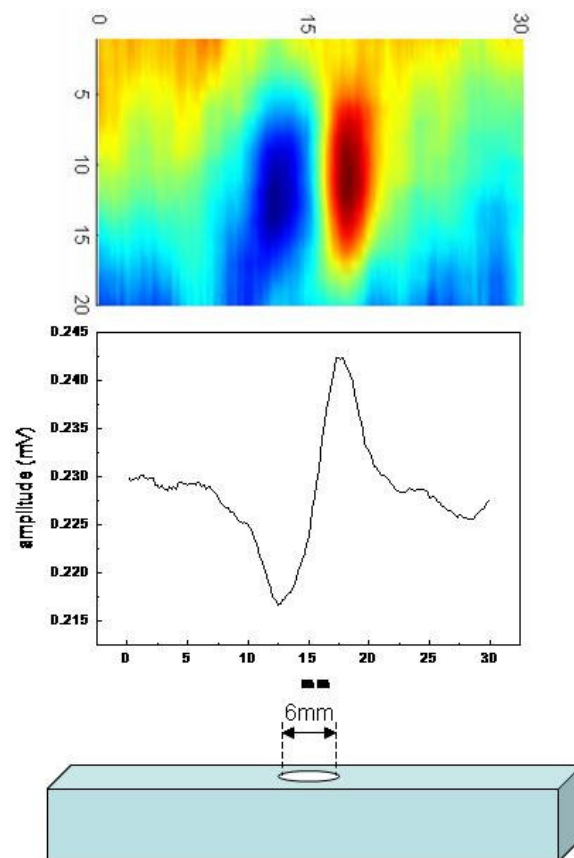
GMR Imaging of AlTi (Ti_6) specimen characterized by a 6mm hole. The measurement has been done with a 30mm diameter coil (supply current 30 mA and 6kHz frequency). The output of the GMR based eddy current probe reveals exactly the hole dimensions.
